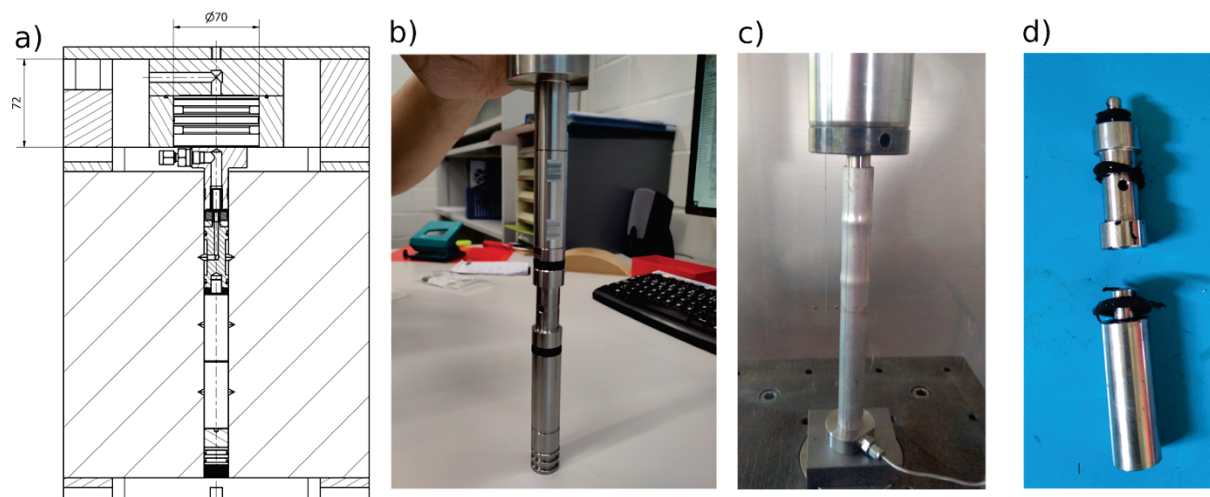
Initial design for a multi-level injection tool. It is composed of 3 modules, 1 for injection and 2 for positioning and support. By moving these modules the injection line can be placed in front of the notch made at different heights in the well. The seal around the injection line is ensured by deforming the 2 O-rings (in black) following a packer-like design.
